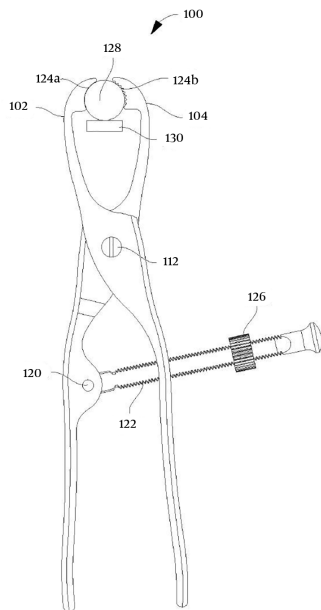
A front view of a bone reduction and internal fixation device to receive a 3.5-inch thin plate
